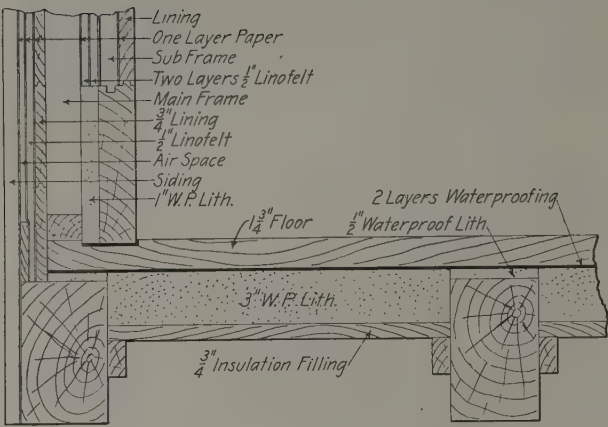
Detail of Improved Refrigerator Car Insulation. Union Fibre Company.
